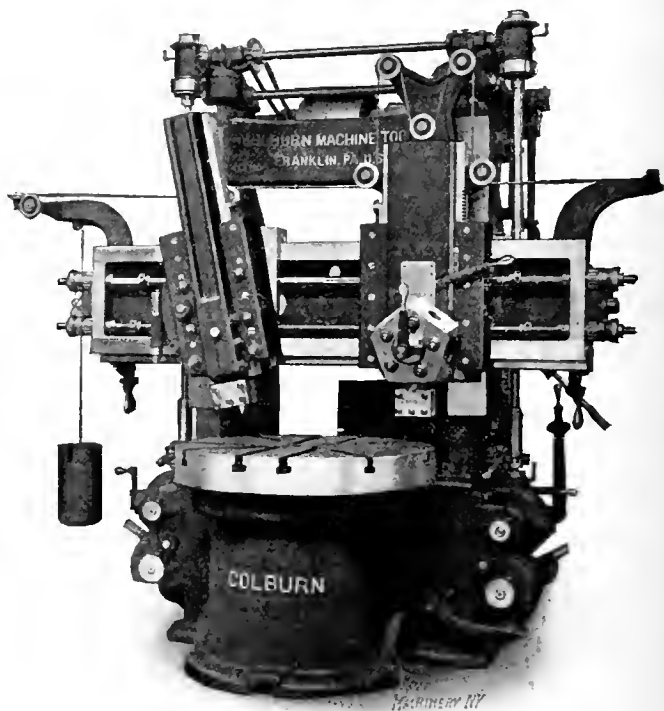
The 42-inch Machine, showing Alternative Form of Feed Box and Turret on the Right-hand Head
